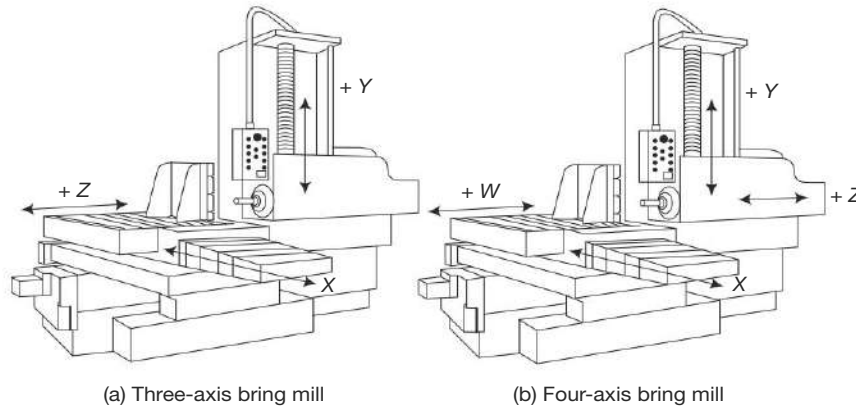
CNC horizontal axis boring mills in 3 or 4 axes versions
